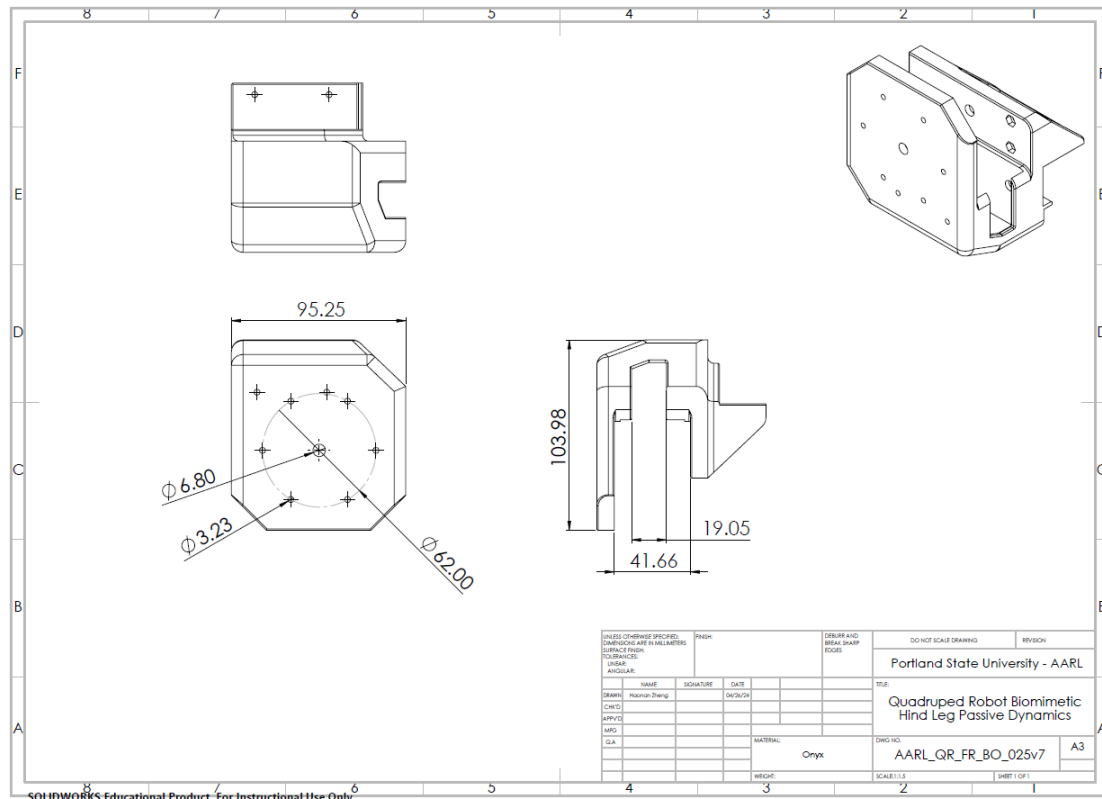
CAD drawing of revised pelvis piece to accommodate new 3D printed springs
